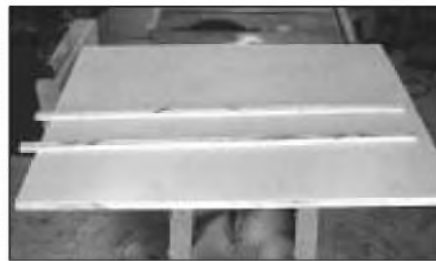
One large piece of plywood and two small strips form the basis of the panel-cutting jig.
